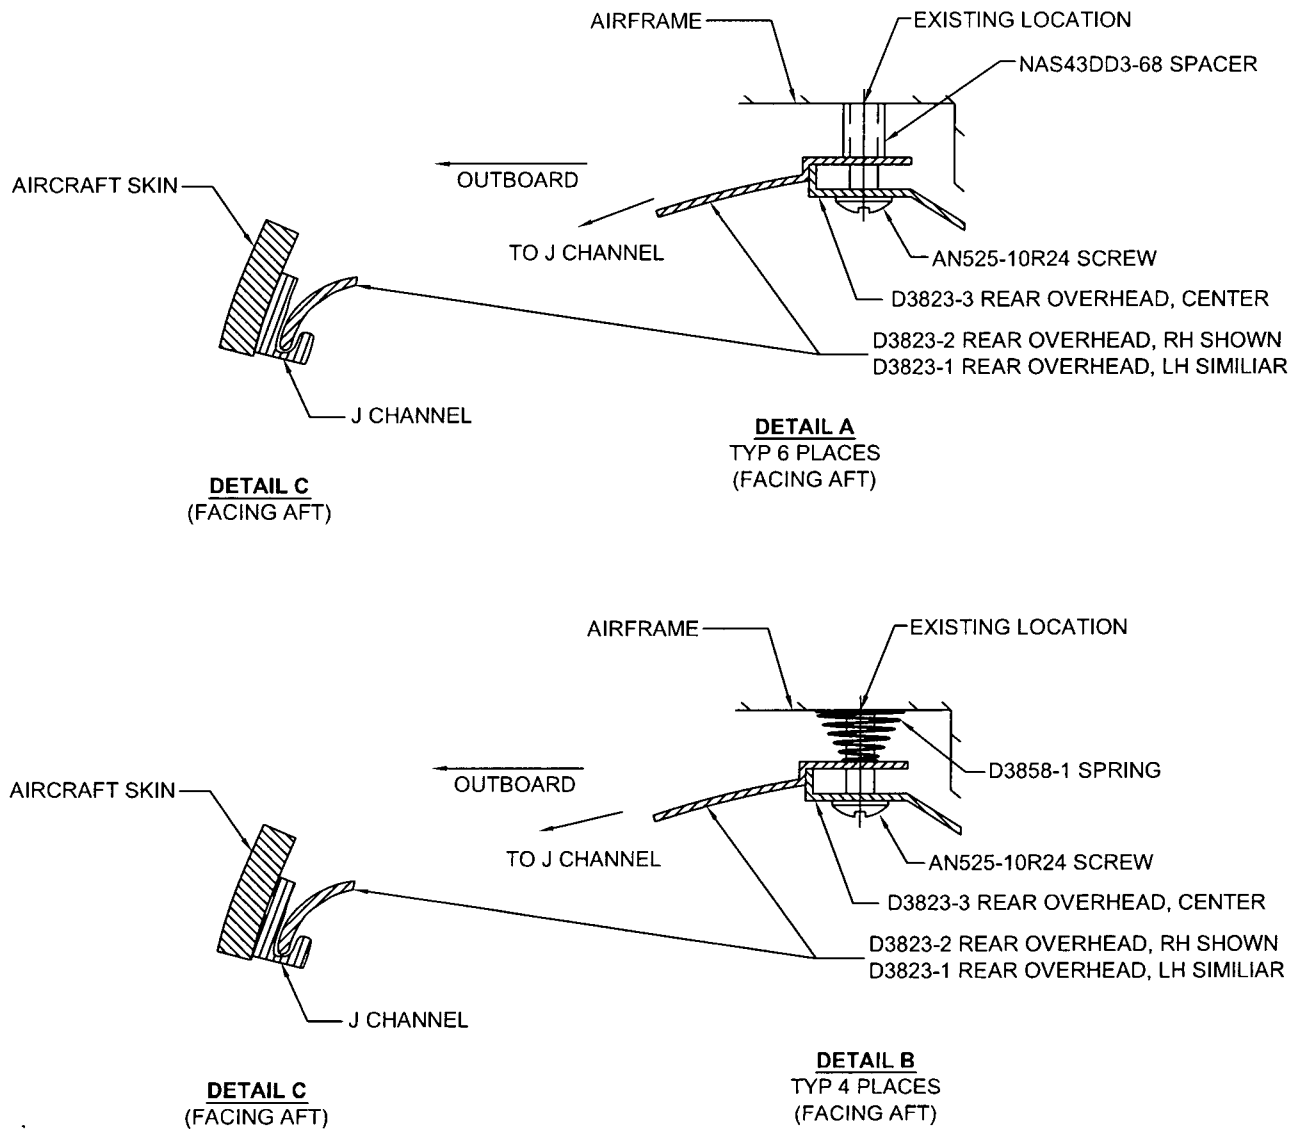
D3823-1/-2/-3 PANEL INSTALLATION DETAIL
